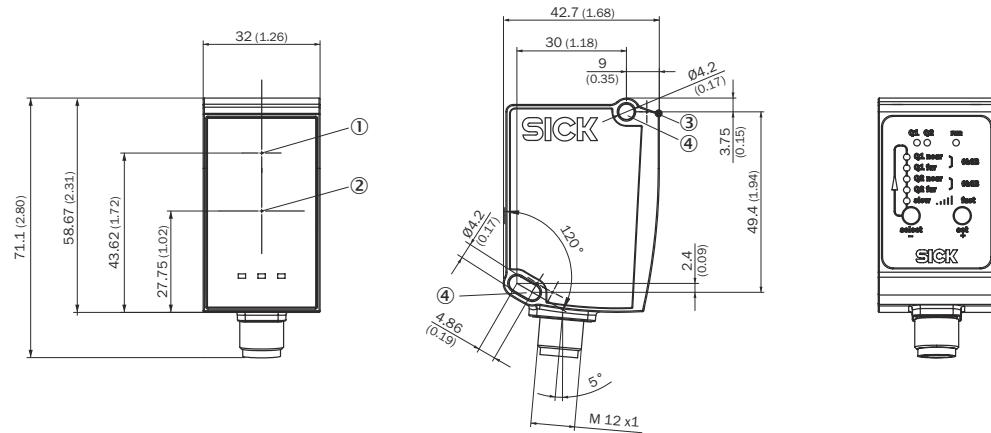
Dx35 dimensions, dimensions in mm (inch), decimal separator: point
